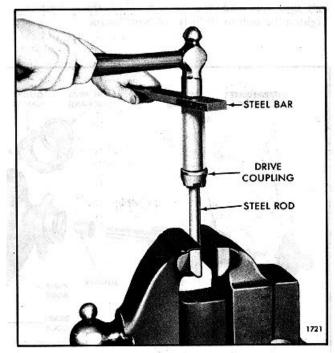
Removing Pump Drive Coupling from Shaft with Tool J 1930
